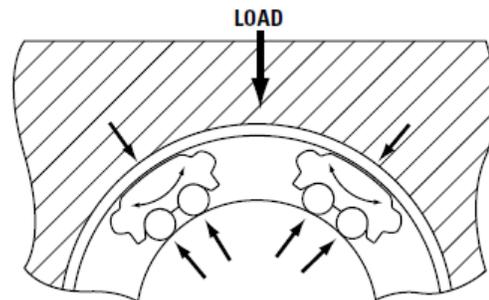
Close-up of Double Track Bearings Showing How They Self-Align (roll) to Evenly Distribute the Load on Each of Their Two Ball Tracks [23]
